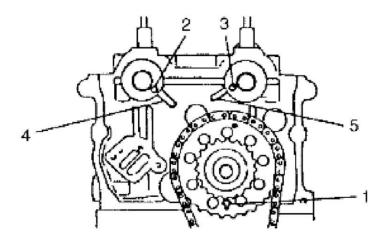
Identifying Match Mark On Crank Timing Sprocket Courtesy of SUZUKI OF AMERICA CORP.
